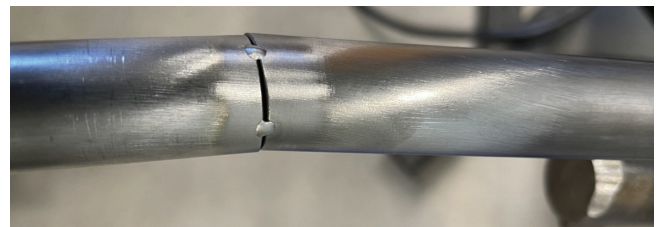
Sample prepared in advance for automatic welding (three fixing points)
